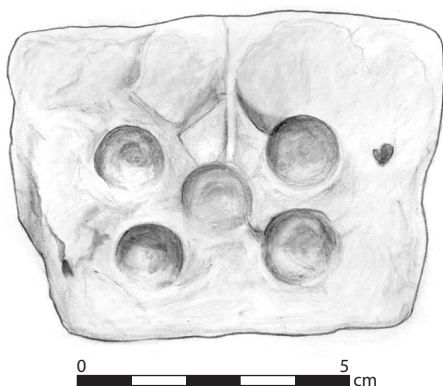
A mould (KM 2944a: 58) made of stone, containing five places (diameter from 12 to 13.5 mm) for casting lead bullets suitable for handguns. Drawing by Elina Terävä.
